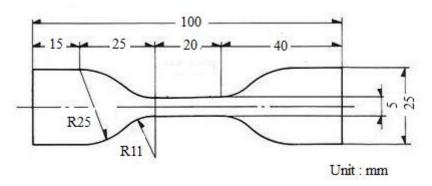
Dimension of dumbbell shape specimen (JIS K6301)
